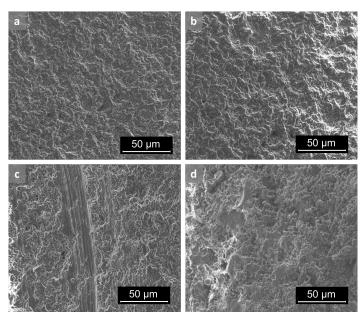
Details of ceramic foam surface after milling with aluminum oxide tools at (a) spindle speed 10000 rpm, flood lubrication [28], (b) spindle speed 40000 rpm, flood lubrication, (c) spindle speed 10000 rpm, MQL, (d) spindle speed 40000 rpm, MQL.
